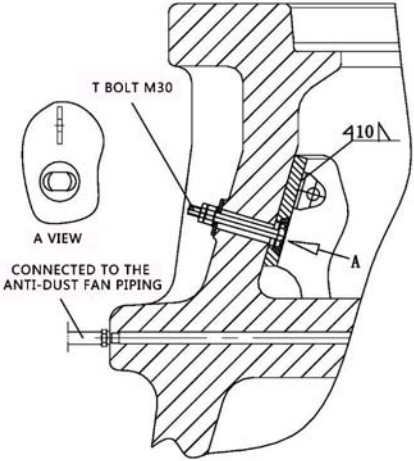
Installation schematic diagram of bottom shell wear liner
